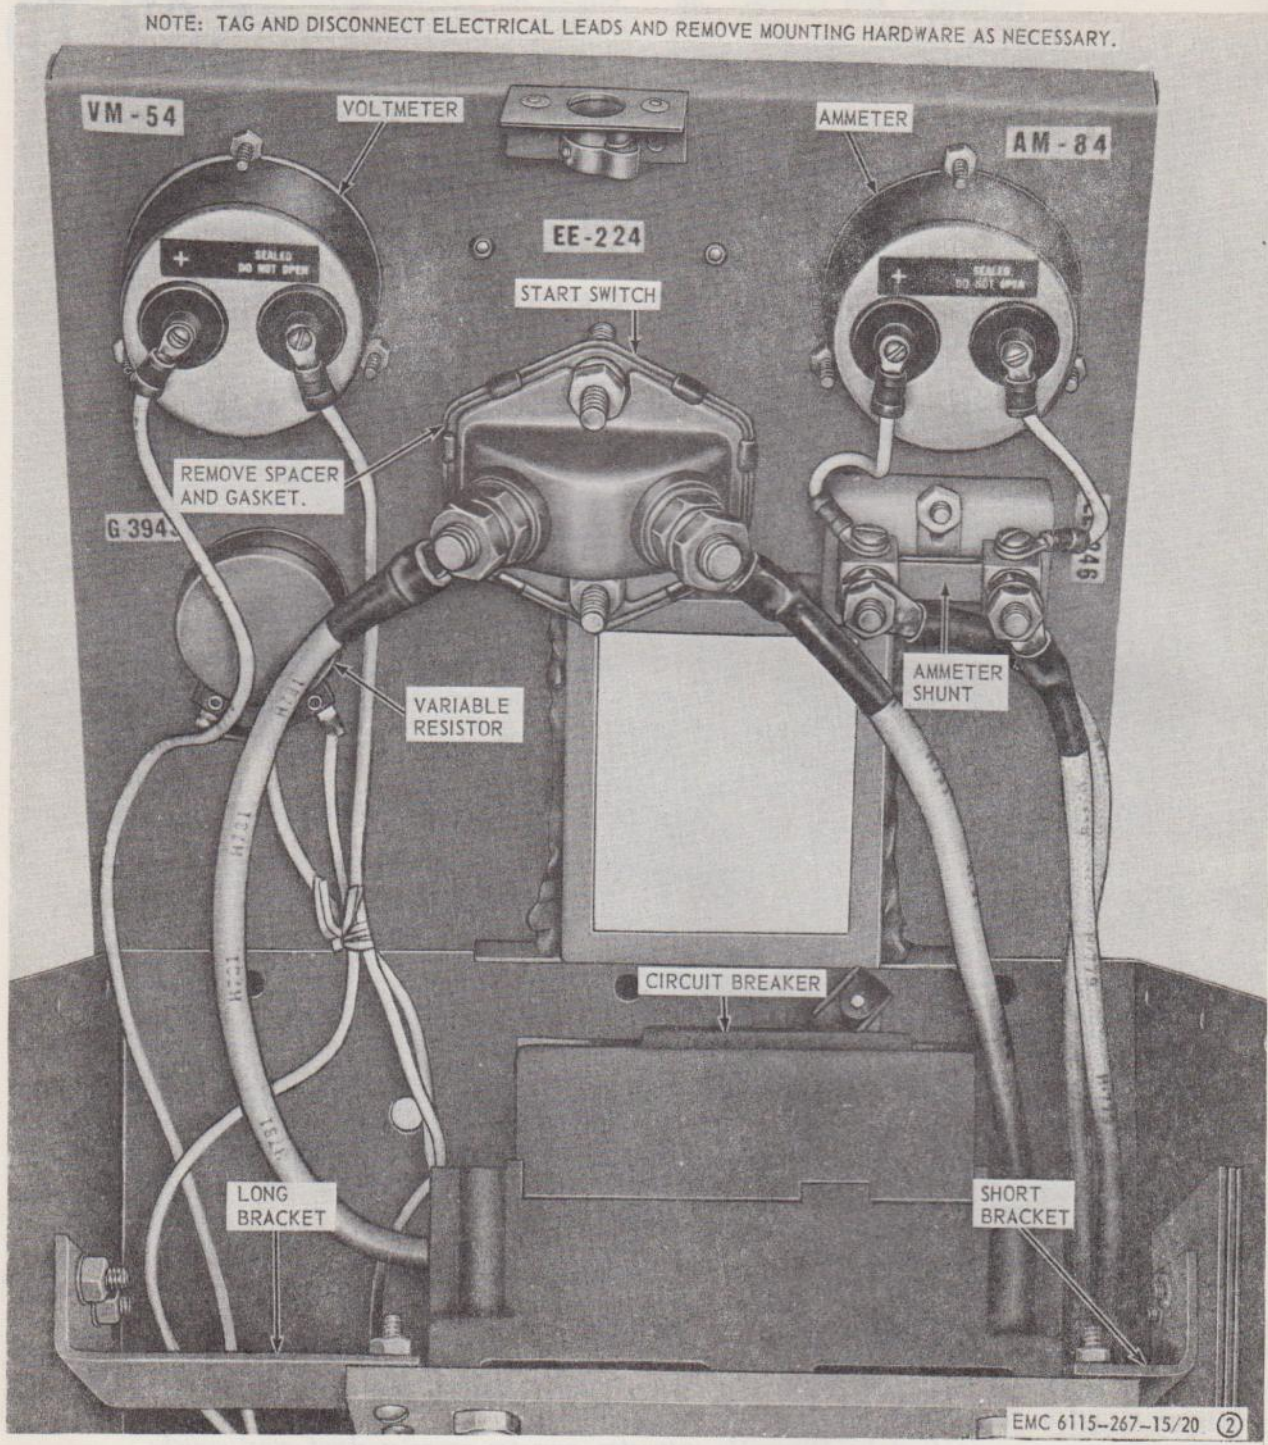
Control panel assembly, voltmeter, ammeter, ammeter shunt, start switch, circuit breaker, and variable resistor—removal and installation.
